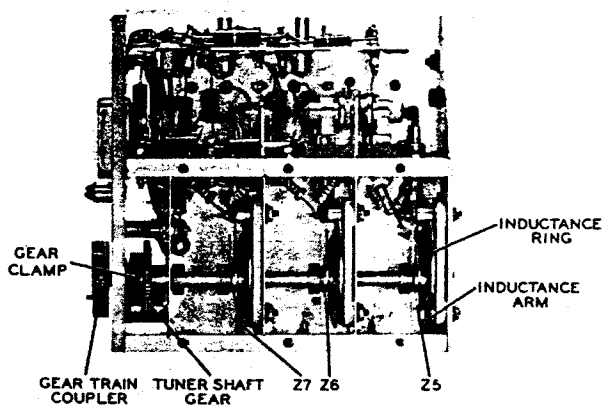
Transmitter Preamplifier, Front View, Cover Removed
